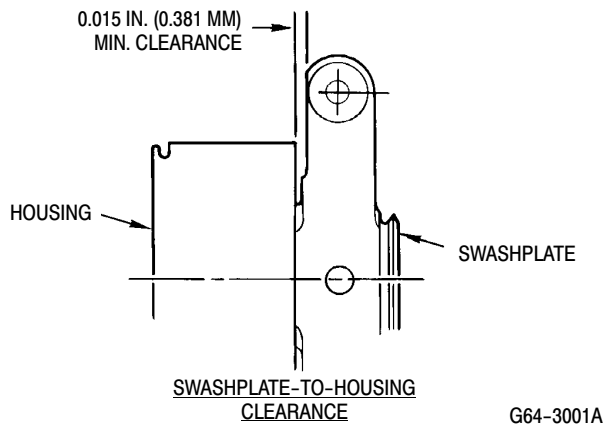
Swashplate-to-Pitch Control Housing Clearance
